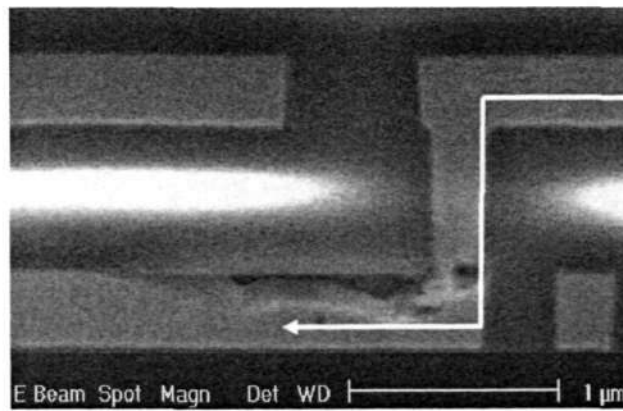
FIB cross section image of lower (M-1) layer test structures
